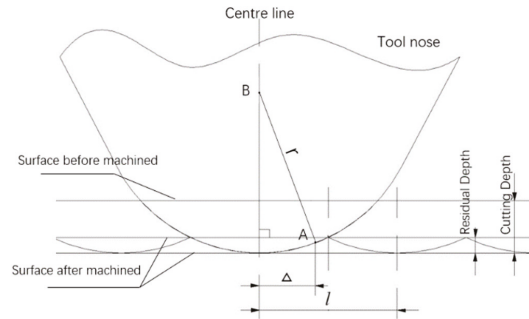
The surface topography geometrical model in SPDT(Pre). l is the length of feed per turn of workpiece; r is the arc tip radius; point $A(x_A, y_A, z_A)$ is an arbitrary position on the end surface of the workpiece; $B(x_B, y_B, z_B)$ is the center of the tool nose arc; Δ is the distance between the center line of the tool nose and point A .
